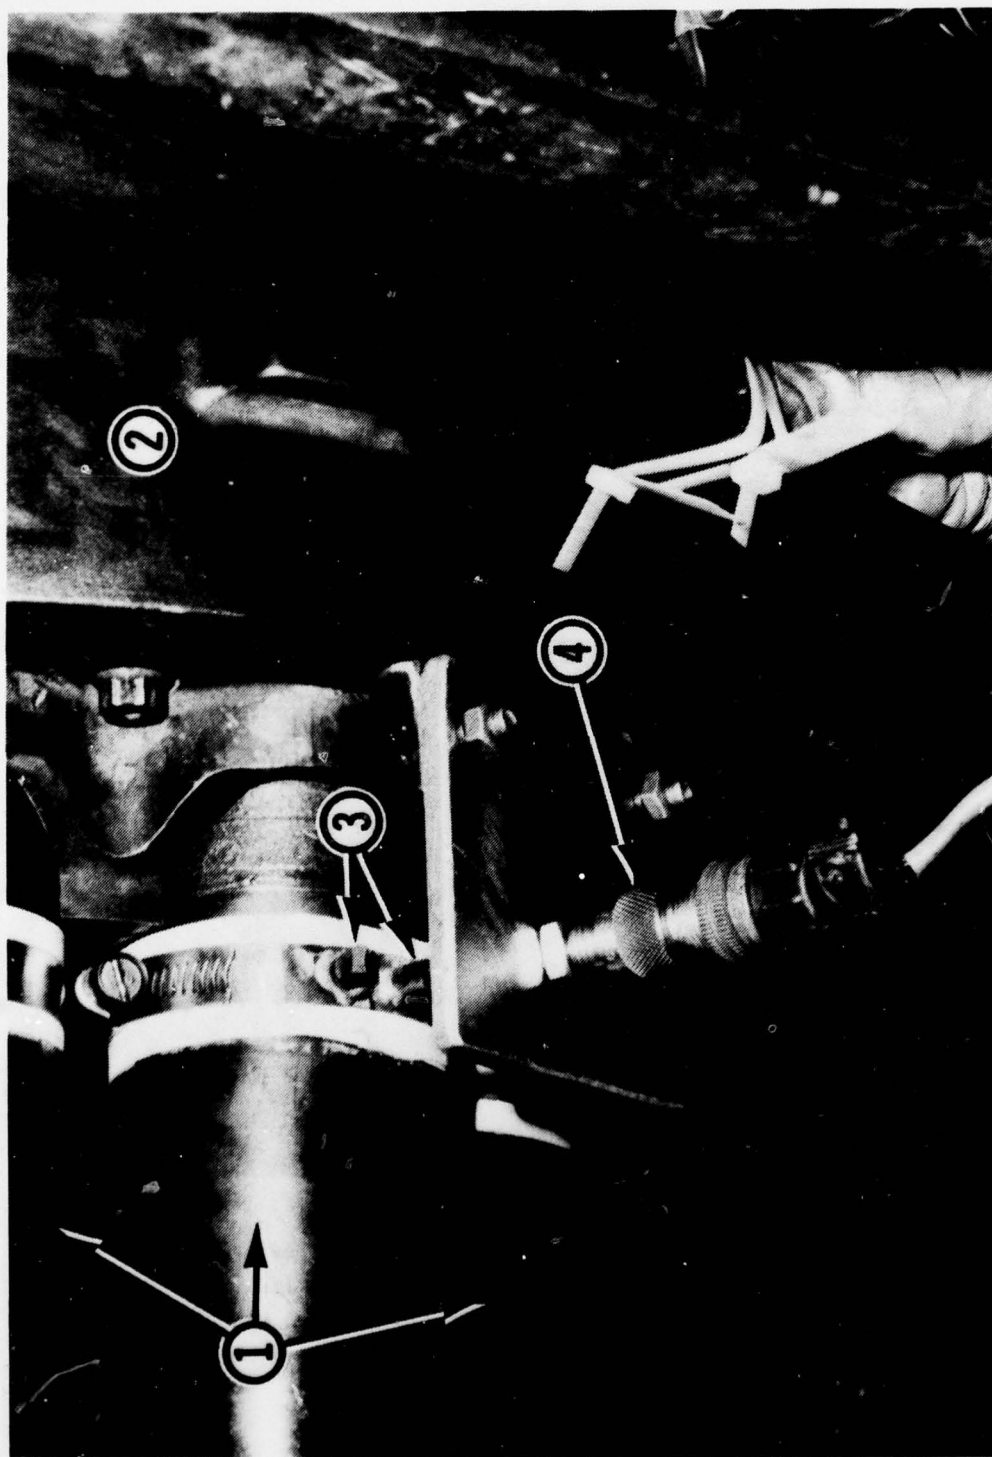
View of (1) gun barrels and (2) housing on prototype GAU-8 gun, showing (3) steel rivets and barrels and (4) magnetic transducer housing
